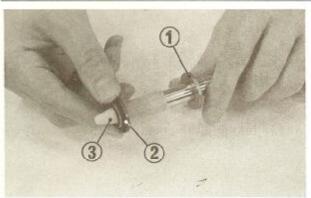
(1) Seal guide (2) Dust seal (3) Cap
